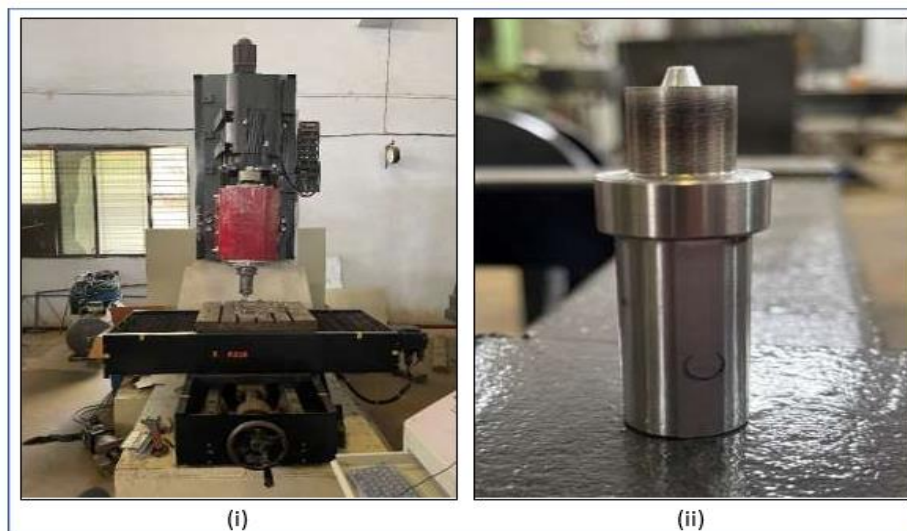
(i) FSW machine (ii) FSW H13 Tool
